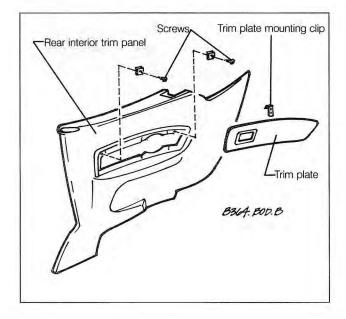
Exploded view of rear interior trim panel on convertible models. Trim panel must be removed for access to upper anchor for front seat belt.
